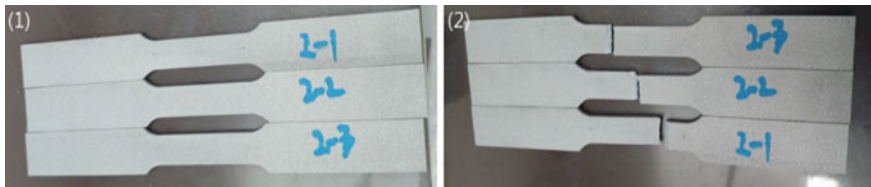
Specimens made by AlSi10Mg for tension testing: (1) Specimens before tensile test; (2) Specimens after tensile test
